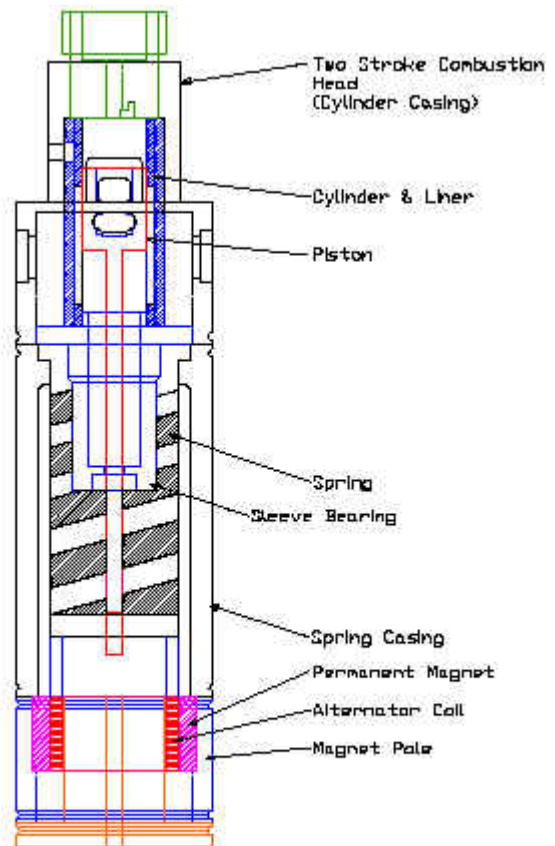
Linear Combustion Engine – the basic mechanical arrangement
